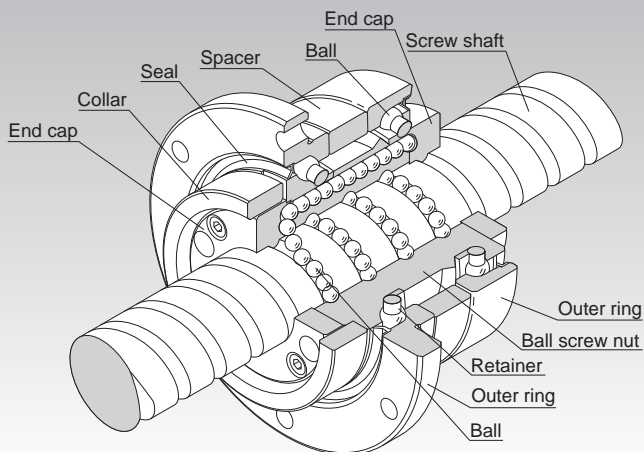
Structure of Large Lead Rotary Nut Ball Screw Model BLR
